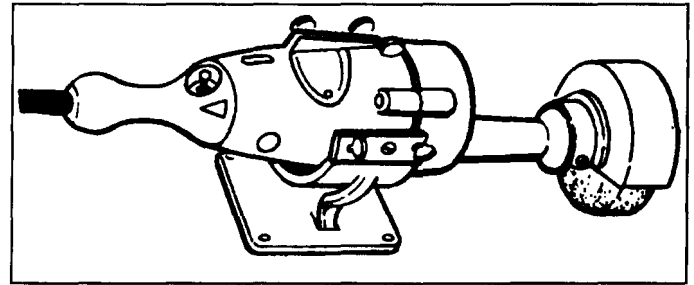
Portable electric grinder (wheel type) with grinder stand.
